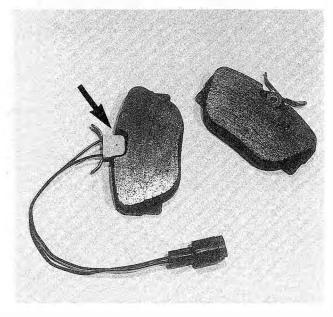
Front left brake pads with brake pad wear sensor (arrow).
